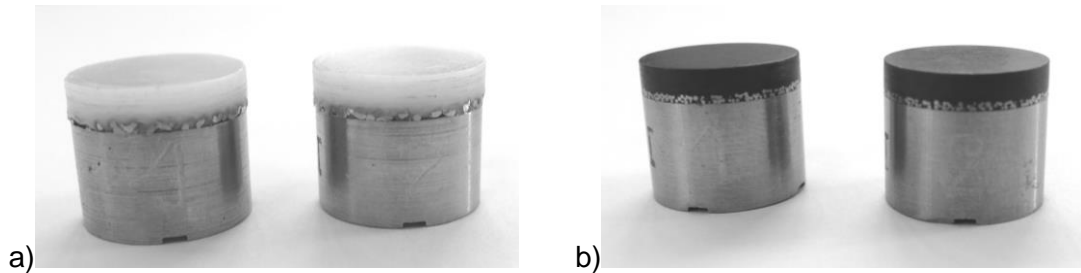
Samples cut out from bearing pads; a) lined with PTFE composite, b) lined with PEEK composite layer.
